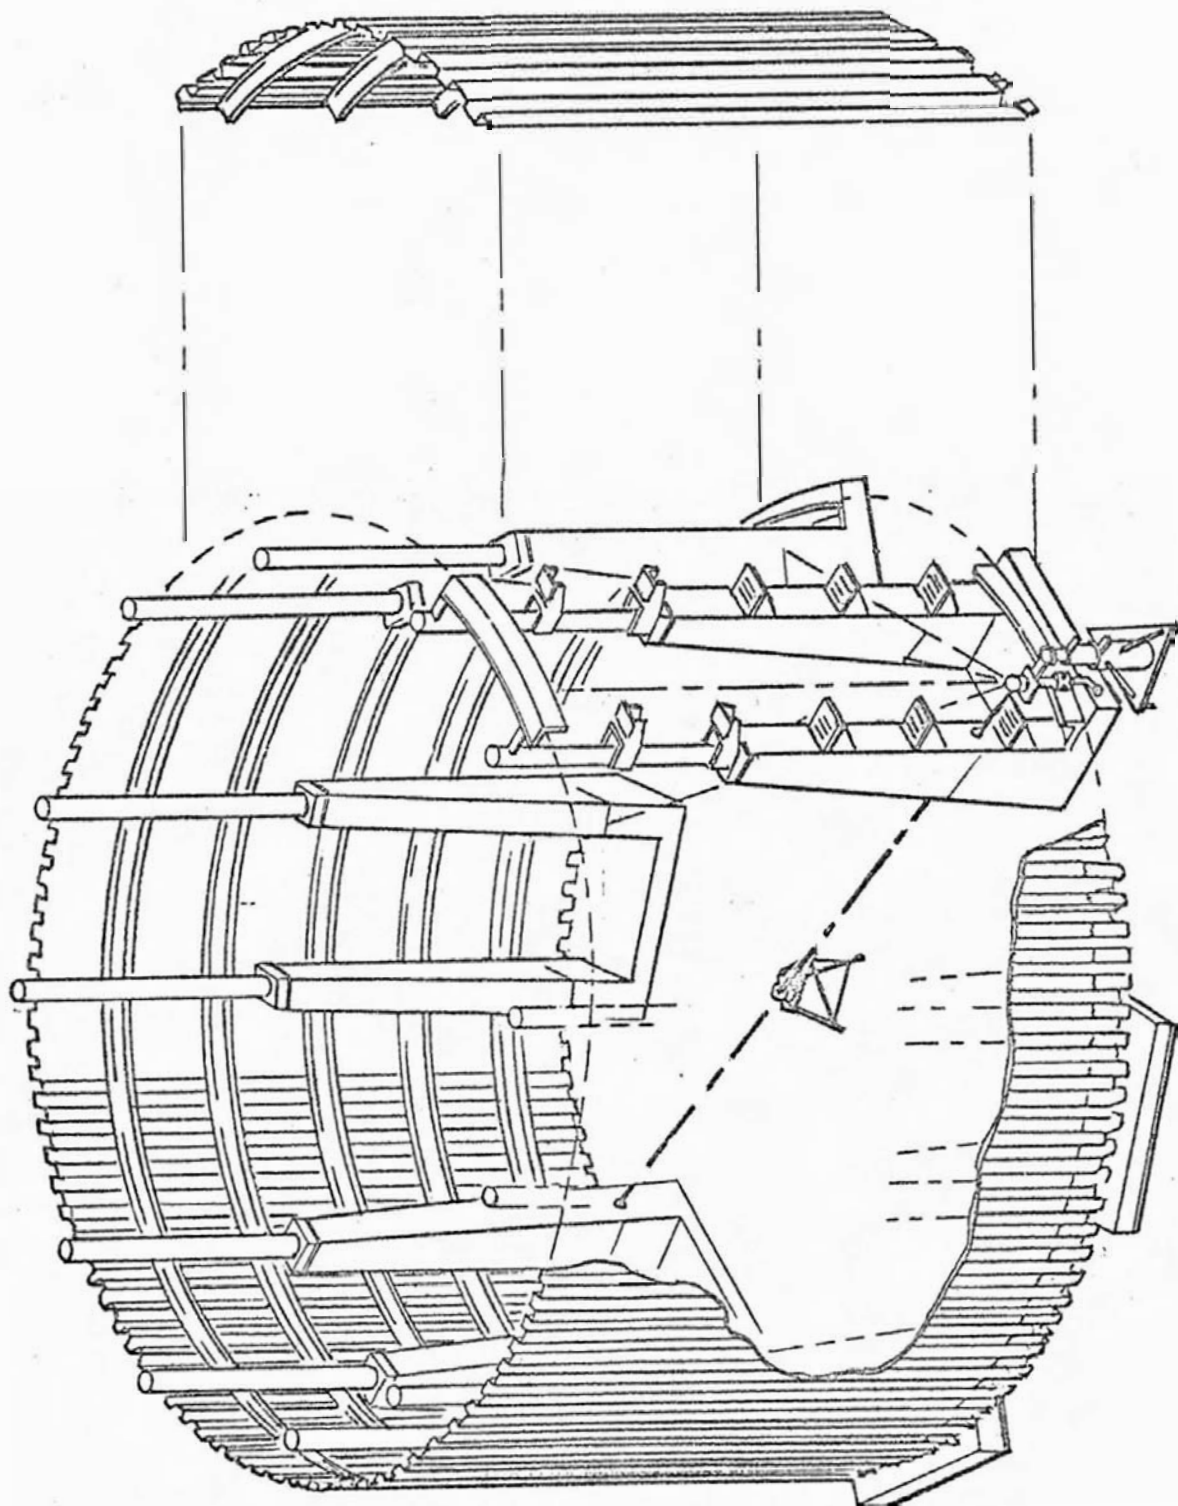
Intertank Structure Assembly Final Assembly Alinement
